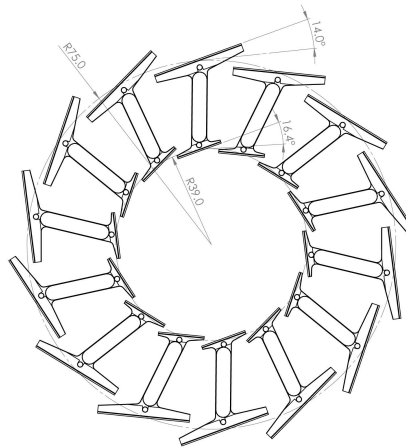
End view illustrating layout of I-beams for two inner pixel layers.
